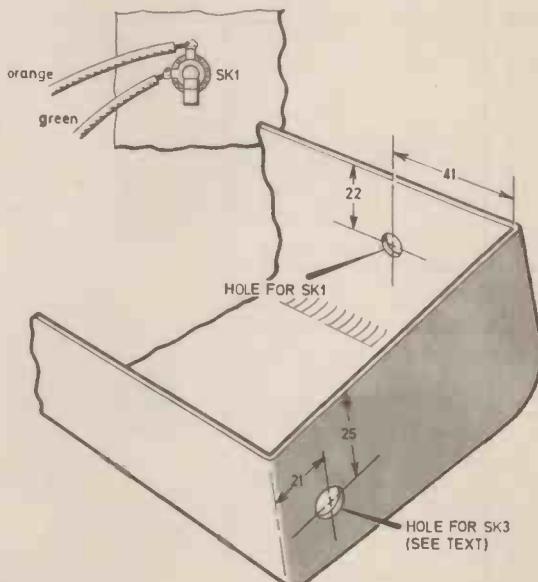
Case drilling details. Locate p.c.b. assembly and check alignment of output socket SK2 before drilling hole for aerial lead connector.
